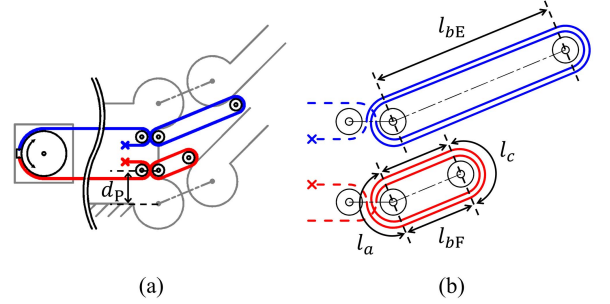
Analysis of rotation link angle and cable length in humpless design. (a) Schematic of the cable windings. (b) Details of the cable lengths wound around multiple pulleys.
